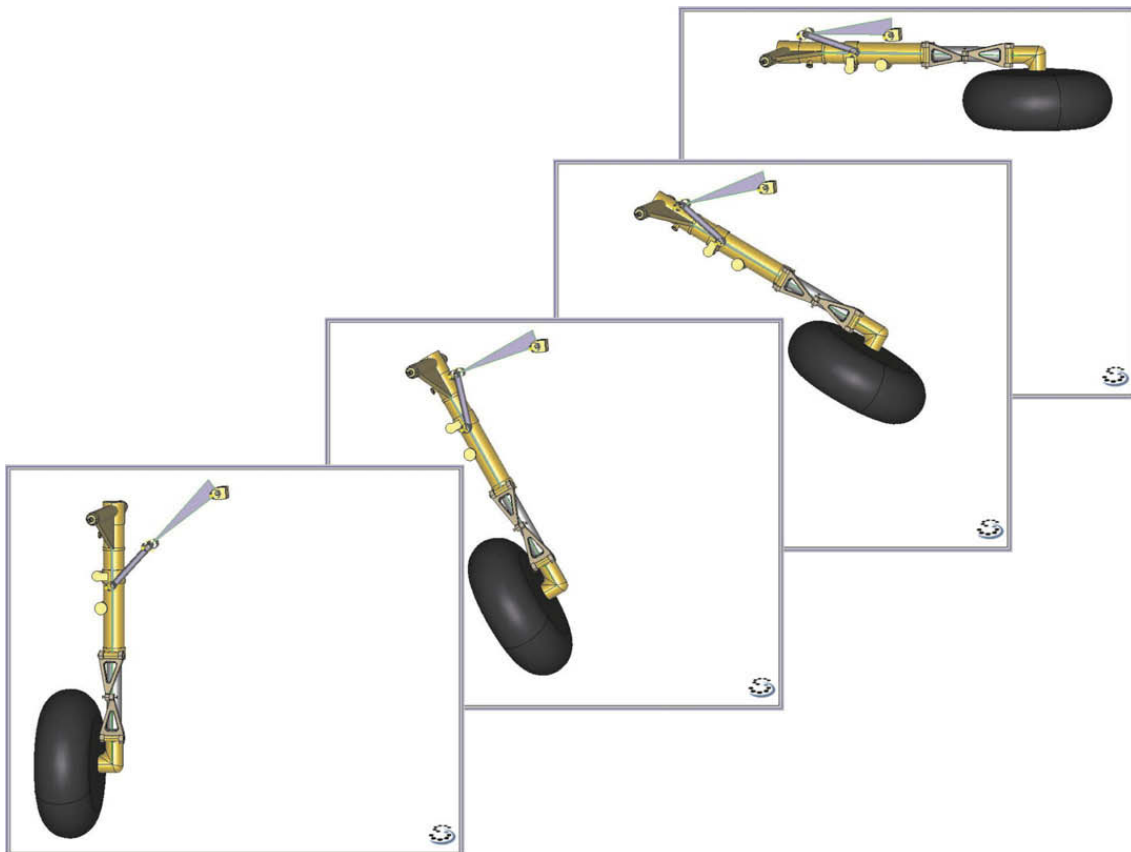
Deployment of a landing gear mechanism passing through four precision positions.
